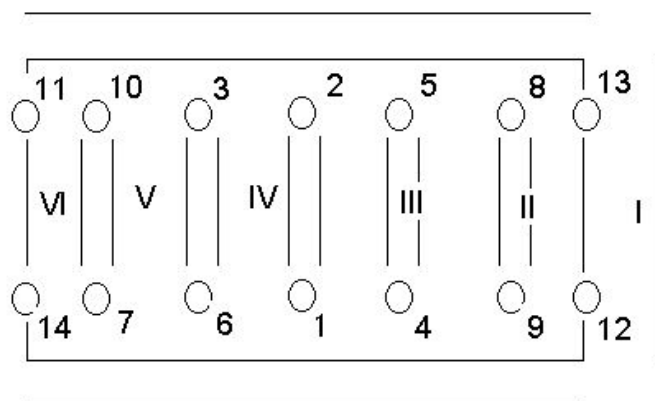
Tightening Sequence of Main Bearing Bolt
